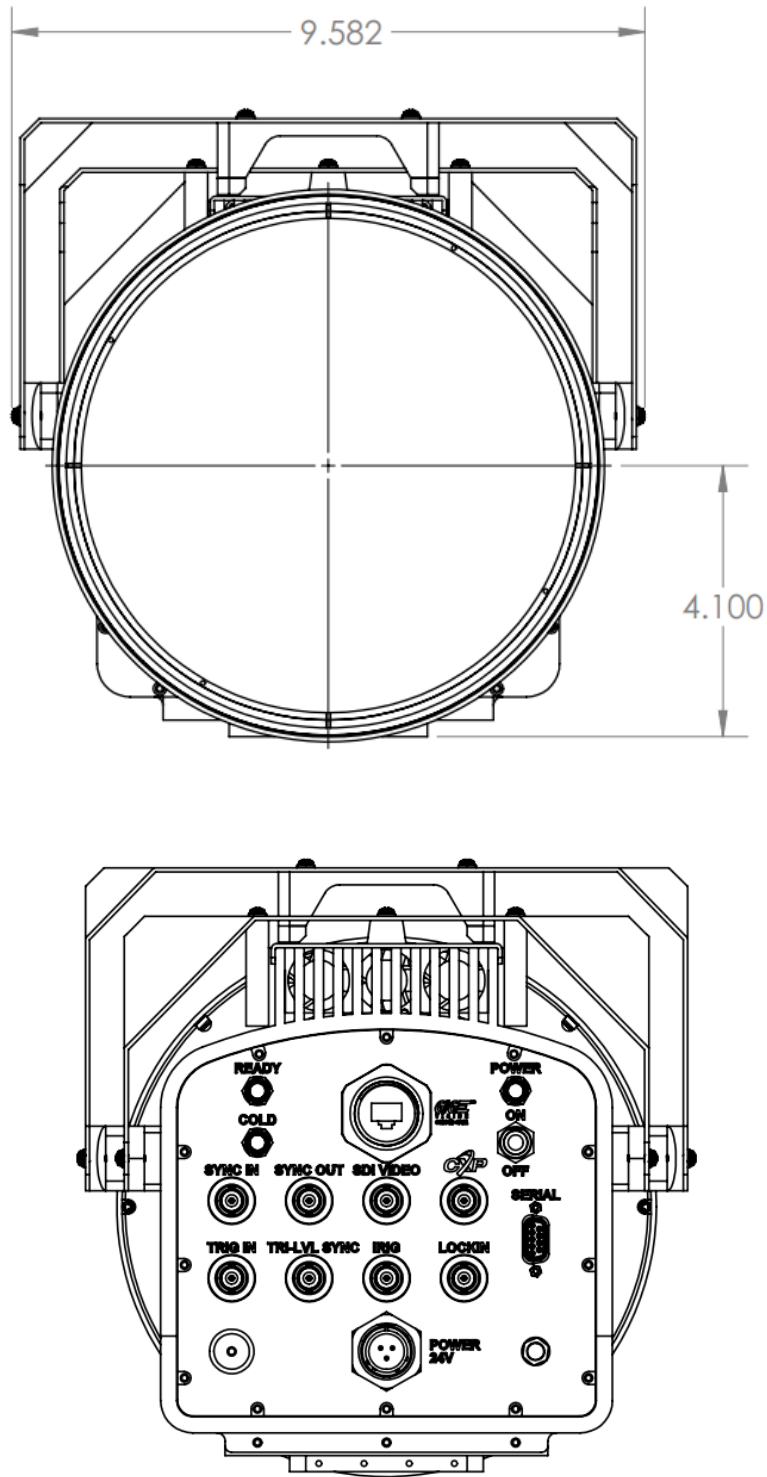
Front and rear view of RS6780 (base zoom)
